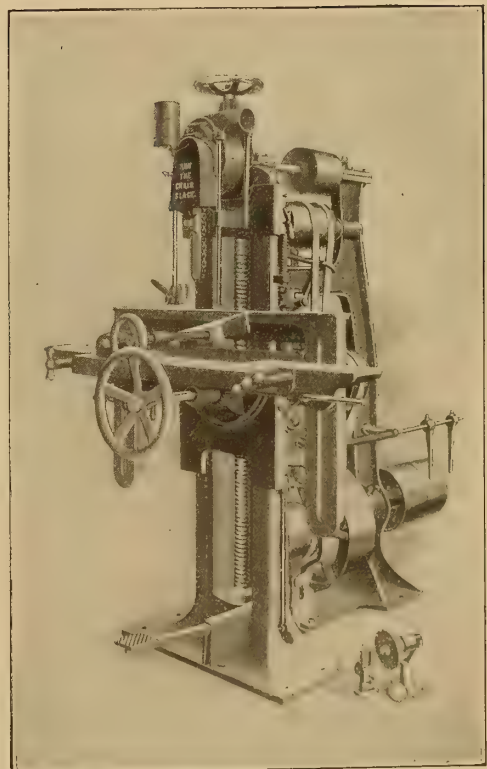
CHAIN SAW MORTISING MACHINE. No. 2. NEW BRITAIN MACHINE CO.
